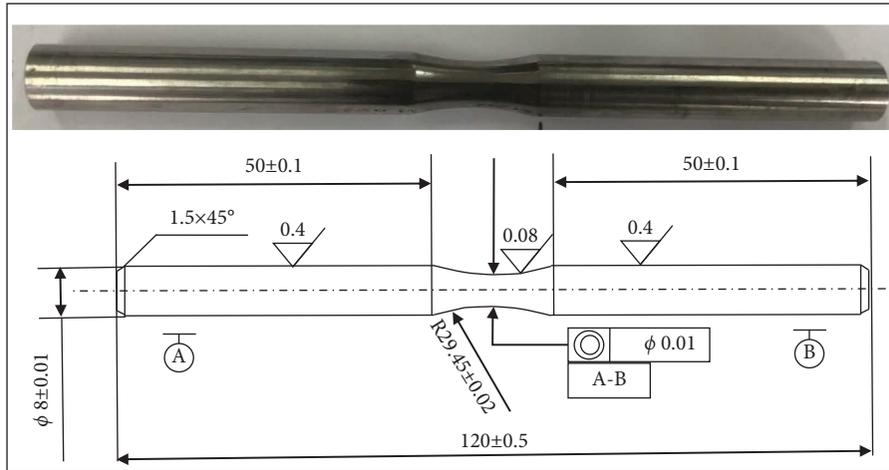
Tensile specimen of the titanium alloy drill pipe.
